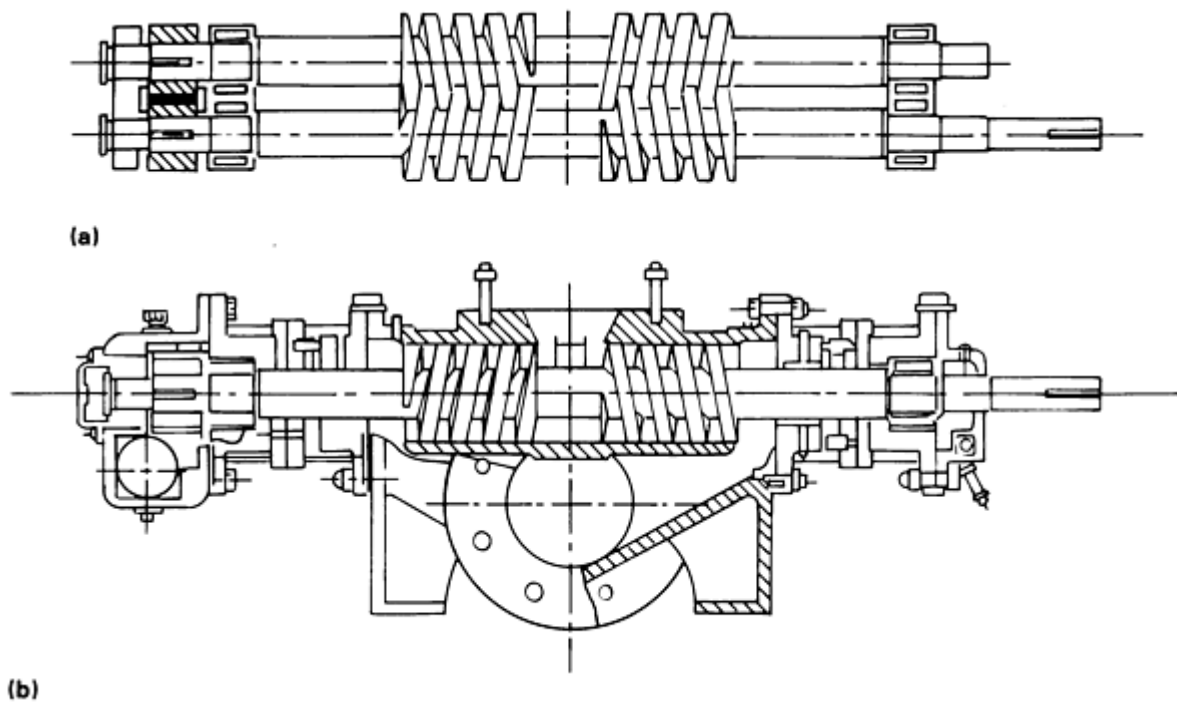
Cross-sectional view of a double-screw pump. (a) Top view. (b) Side view. Courtesy of Dresser Pump Division, Dresser Industries
